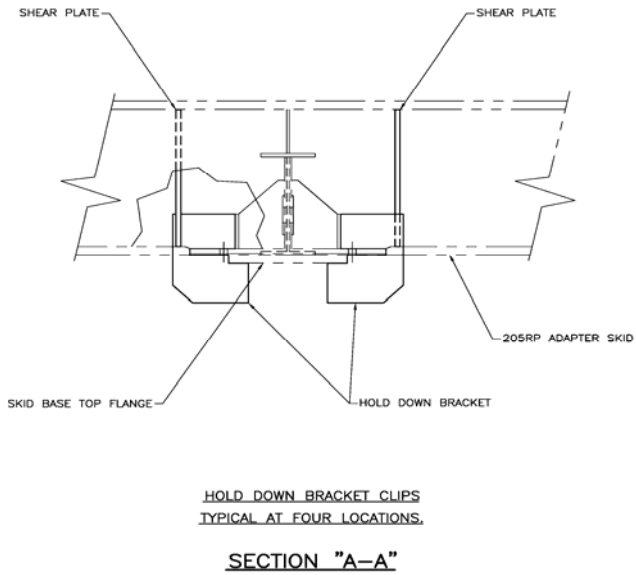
Hold down clamps / brackets (see plan in Figure 1 for location)
